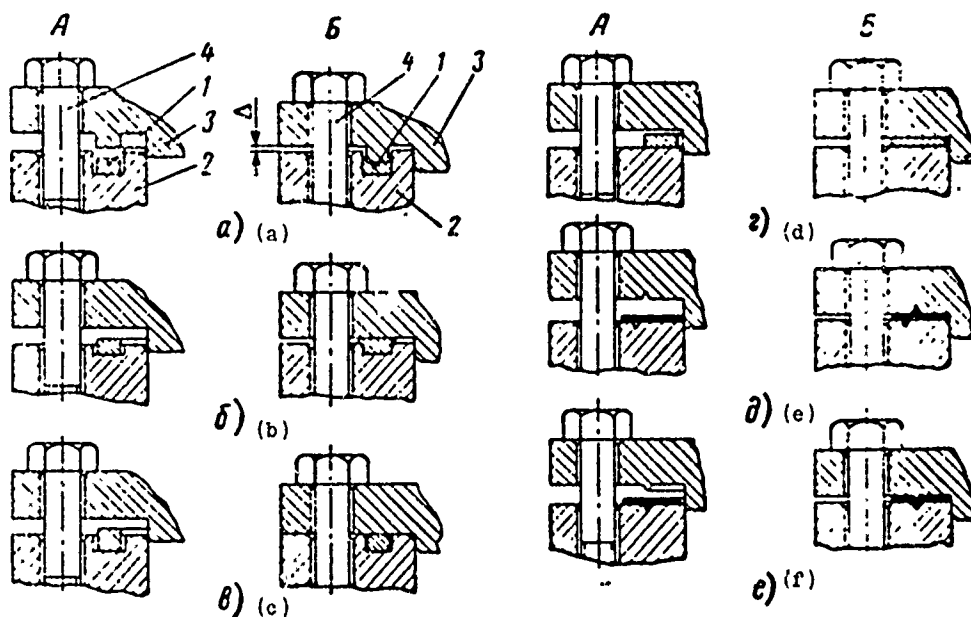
Various methods of installing gaskets: a - position before tightening the gasket; 5 - position after tightening the gasket; 1 - gasket; 2 - housing; 3 - cover; 4 - bolt.
